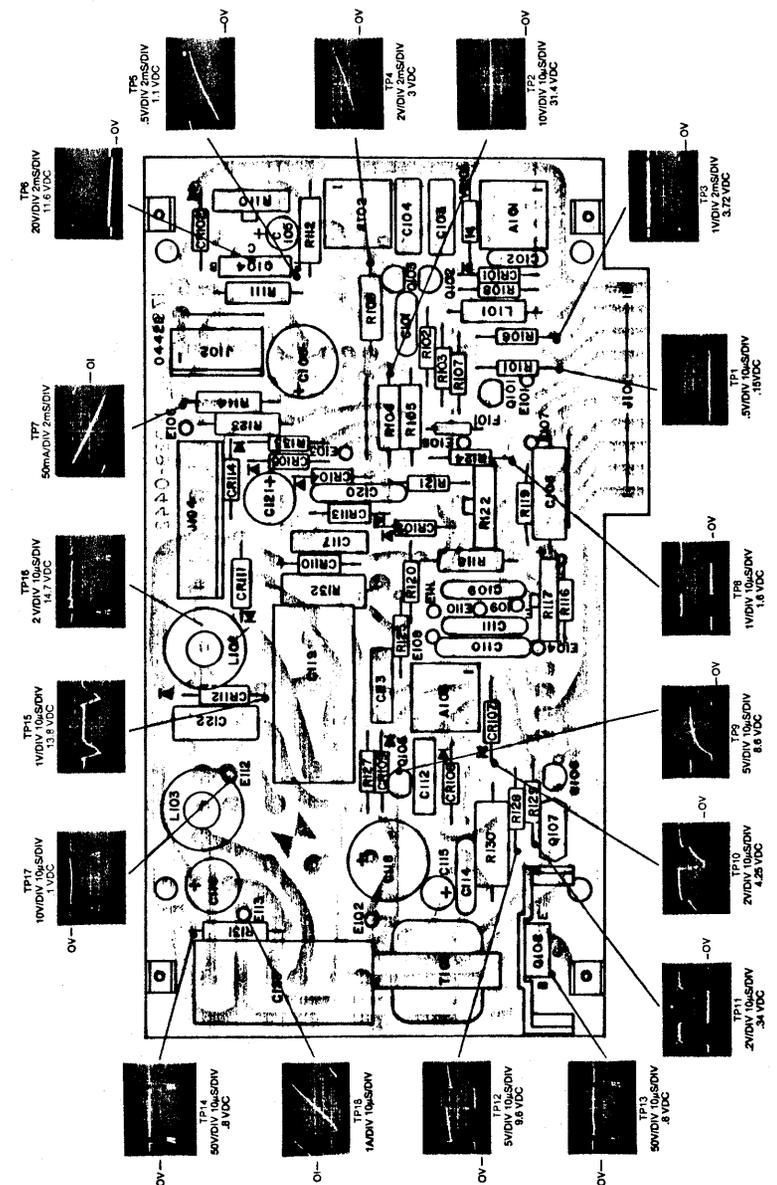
TV 90/120, 15V Parts List, Waveform and Component Layout
